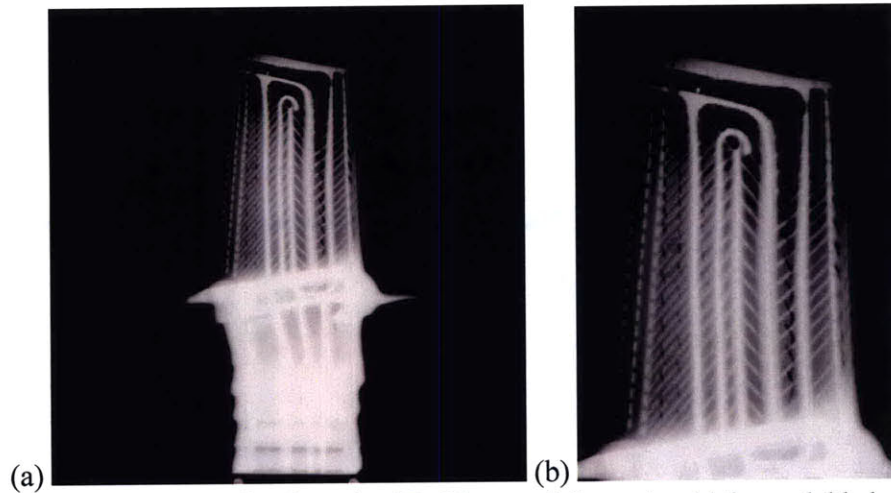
(a) Selected 2D slice from the 3D-CT scan of the post weld tip crack blade sample after adjustment of brightness, contrast, exposure and image inversion (b) Internal crack ROI. No internal crack is detectable.
